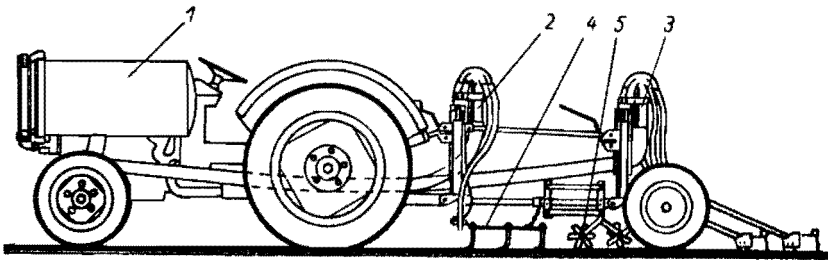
Combined assembly of pneumatic drills with scarifying implements: 1—hopper; 2—fertilizer unit; 3—feeding unit; 4—scarifier; 5—rotary harrow.
